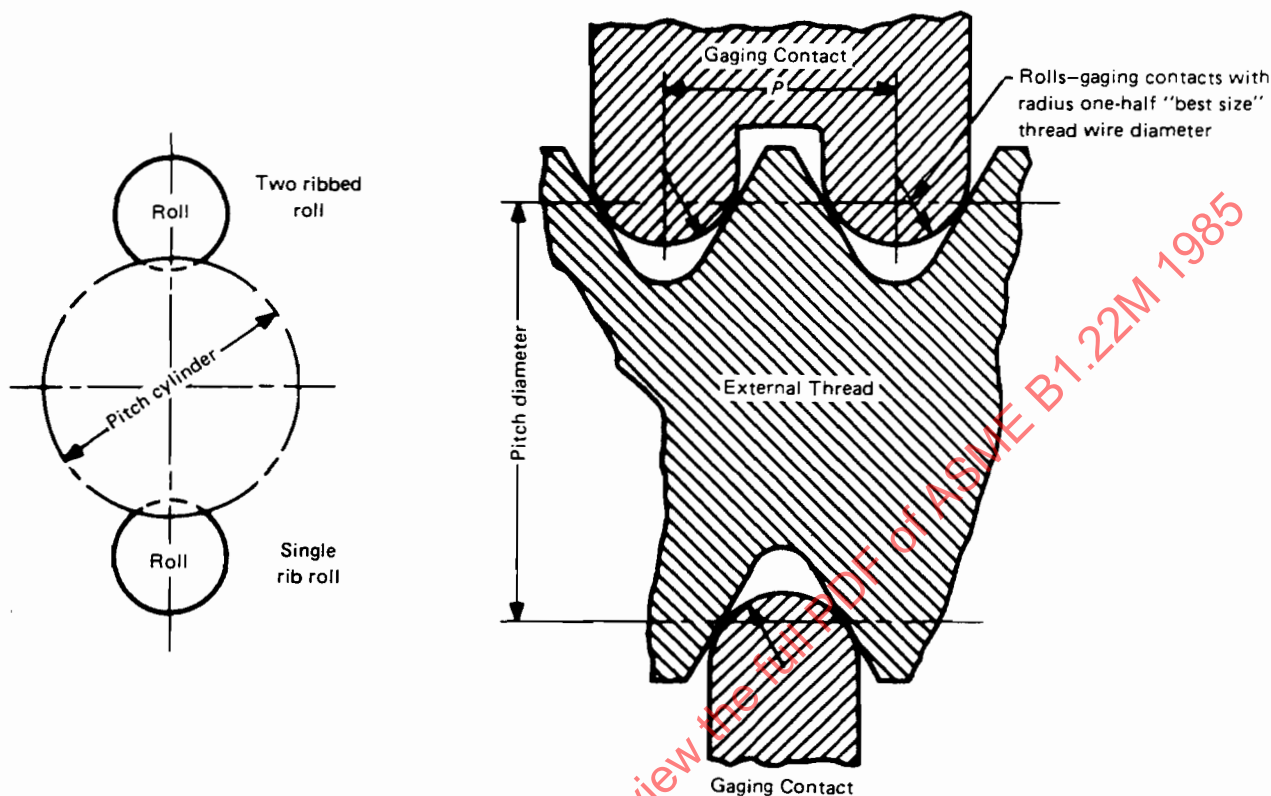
THREAD SNAP GAGES — MINIMUM-MATERIAL THREAD-GROOVE DIAMETER LIMIT
